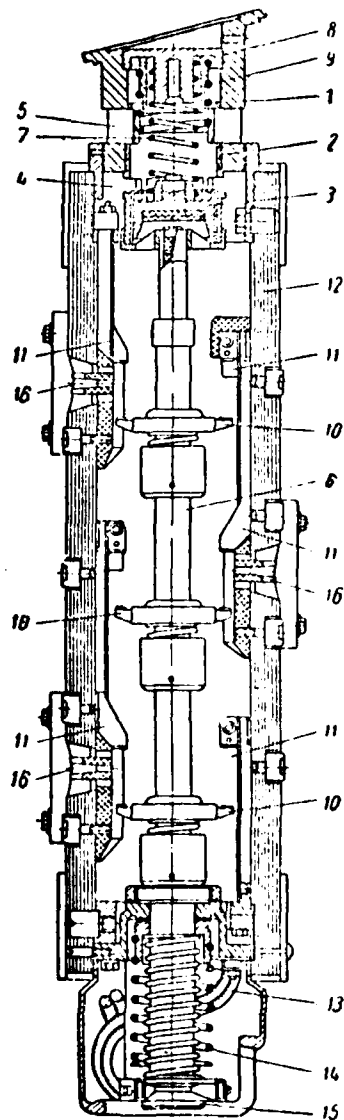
Arc-suppression chamber/camera of an oil breaker of the type BKP-220 on 220 kV. 1 - holder; 2 - cylinder; 3 - piston; 4 and 5 - opening/aperture; 6 - rod; 7 - spring; 8 - backstop; 9 - auxiliary
